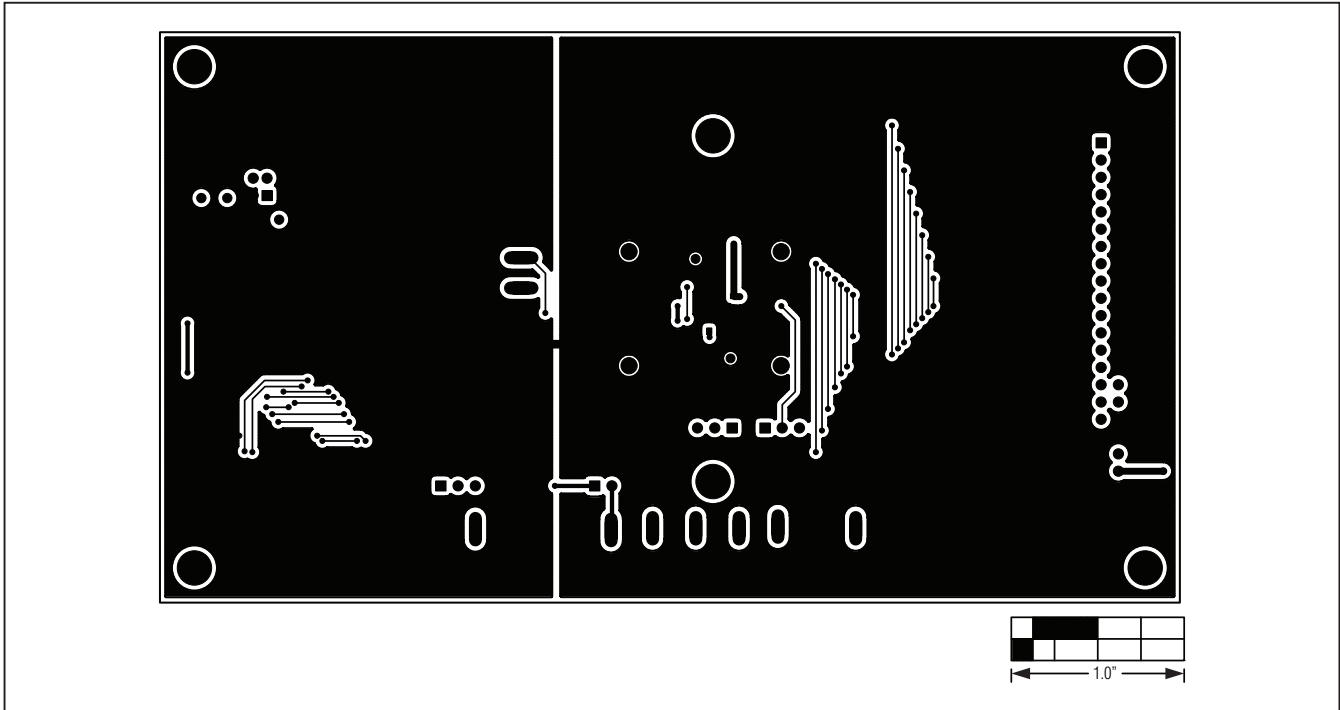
MAX9674 EV Kit PCB Layout—Solder Side
